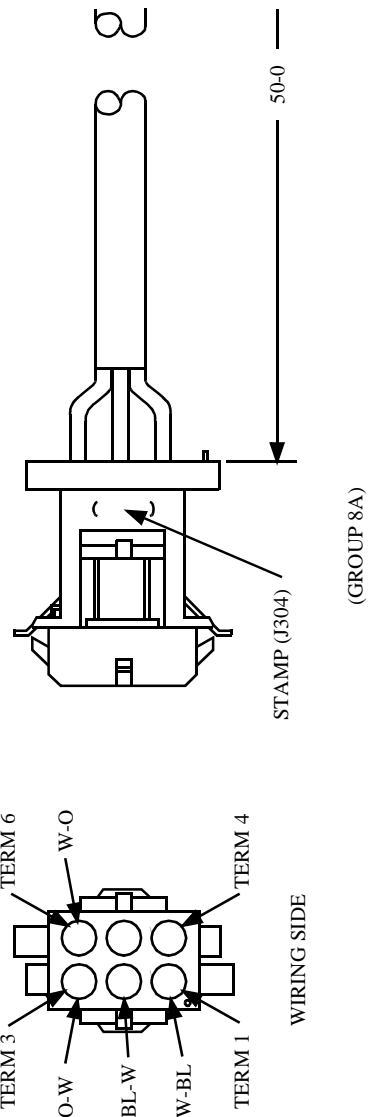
ED-7C723-35 Group 8A Cable Assembly
